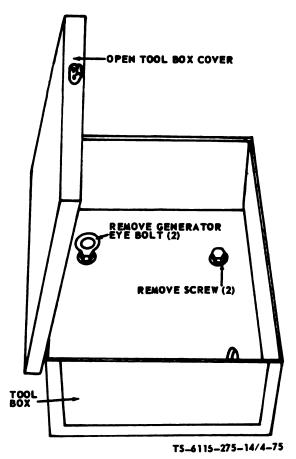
Tool box, removal and installation, (Model MEP-018A).
